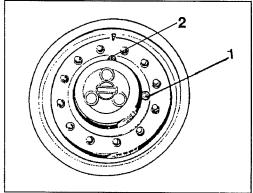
Level check - planetary gearing 1 Level plug 2 Filler plug
